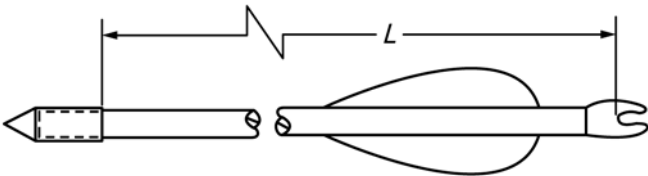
Arrow Assembly With a Head That Has an Integral Cylindrical Socket (See 2.1.2.4)
